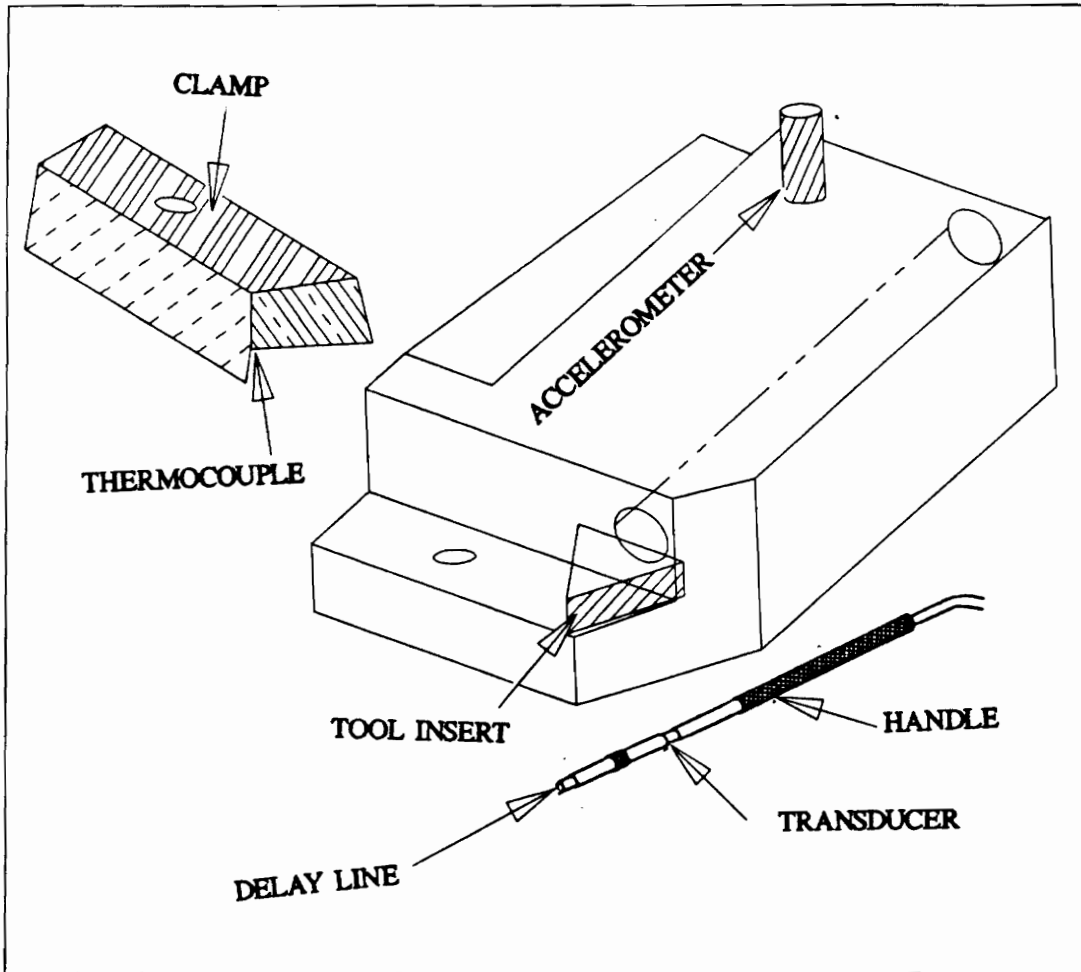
Schematic Representation of Transducer and Tool Holder
